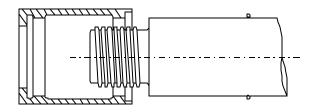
Hook Type Shaft Sleeve Arrangement
